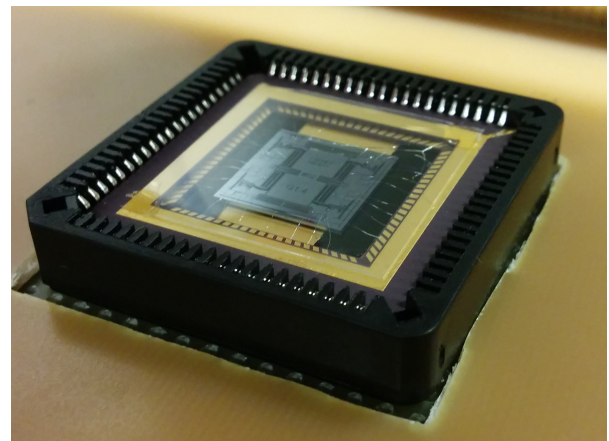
Final assembly of the device, sealed carrier containing bondwired device is placed in zif-socket in this picture.
